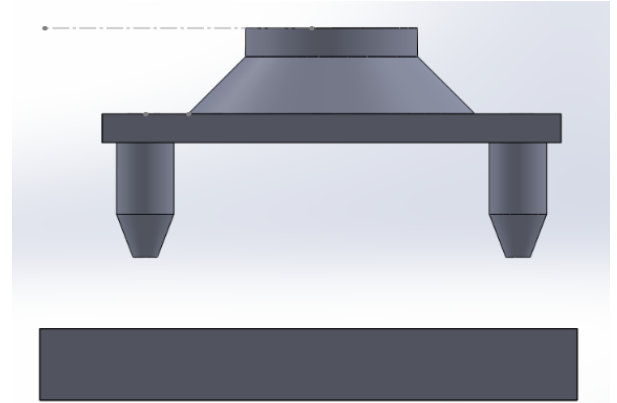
(b) - SolidWorks 3D model of silicon rubber key and PCB (front view).
